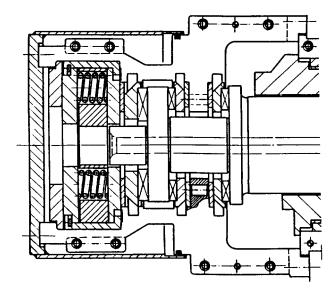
Double thrust bearing design of test gear. (Source: MAAG Gear Company.)
